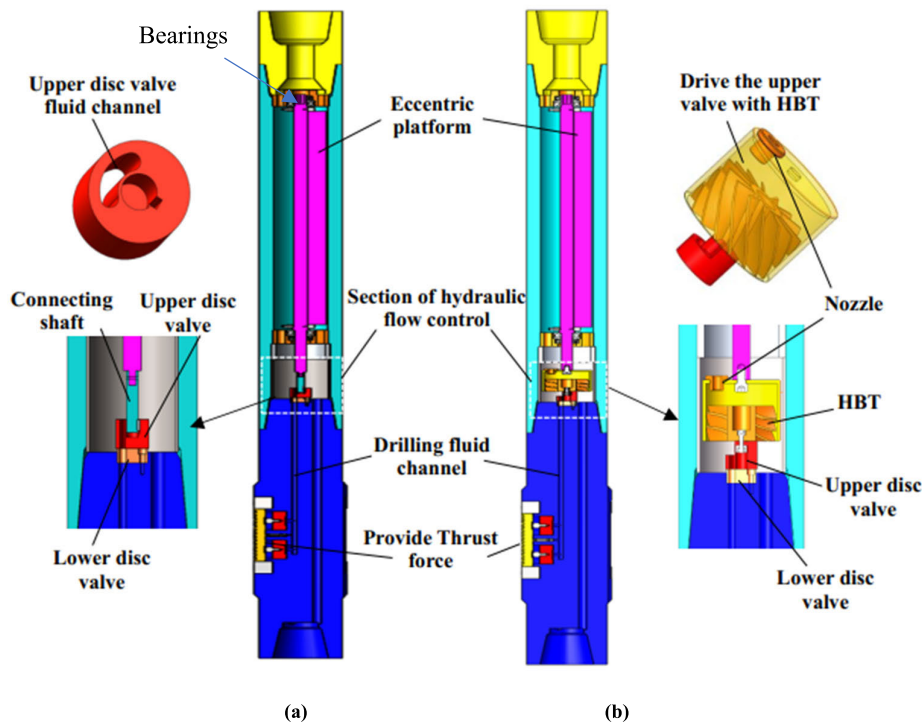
Two design of MVDS, (a) Original design; (b) New design. In the new design, the eccentric platform control the up disc valve with a nozzle to drive the HBT stable in the low direction of the wellbore, then the vibration of the tool caused by pads will not affect the stability of the eccentric platform. The “soft” connection between the eccentric platform and the upper disc valve is realized.
